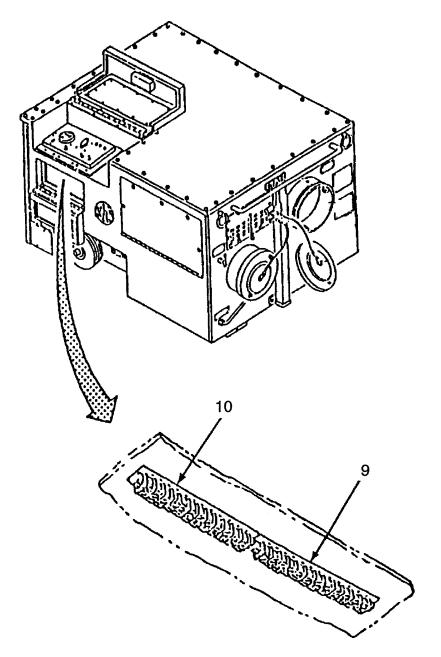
Control Box Assembly Terminal Boards/Transformer (Sheet 2 of 3)
